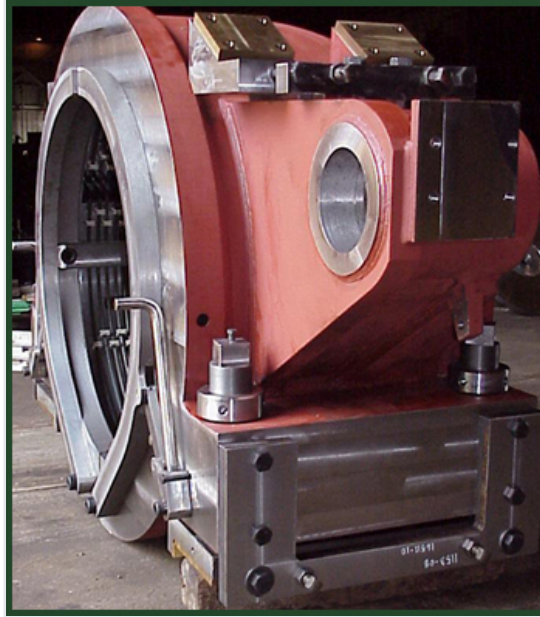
Container Housing and flat guide system. (Photo courtesy of Lake Park Tool)
